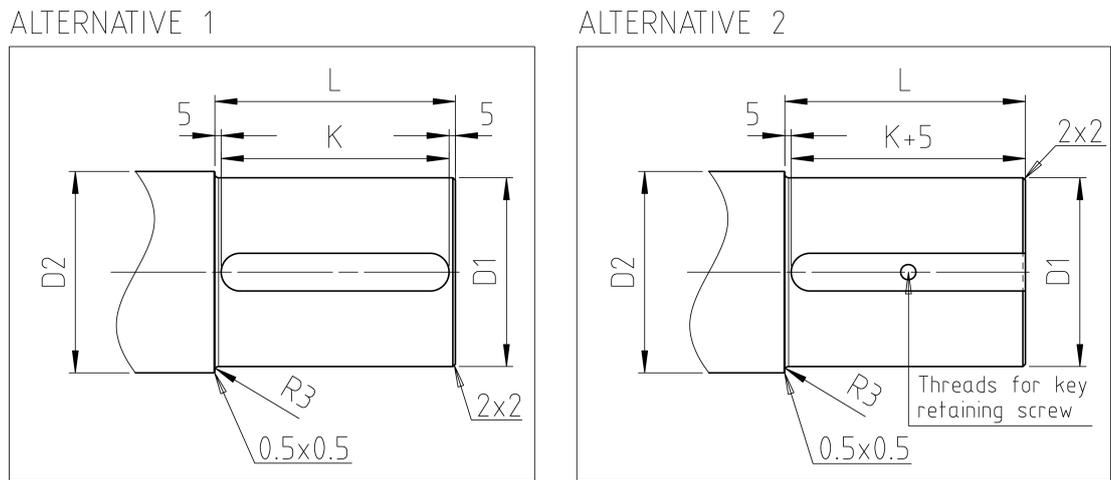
Connection engine/single bearing generator (V64L0071B)
